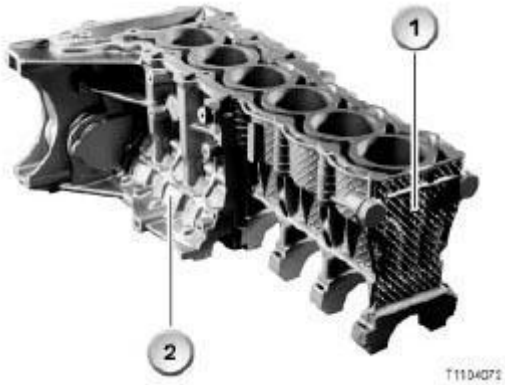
Identifying Magnesium-Aluminum Alloy Crankcase
